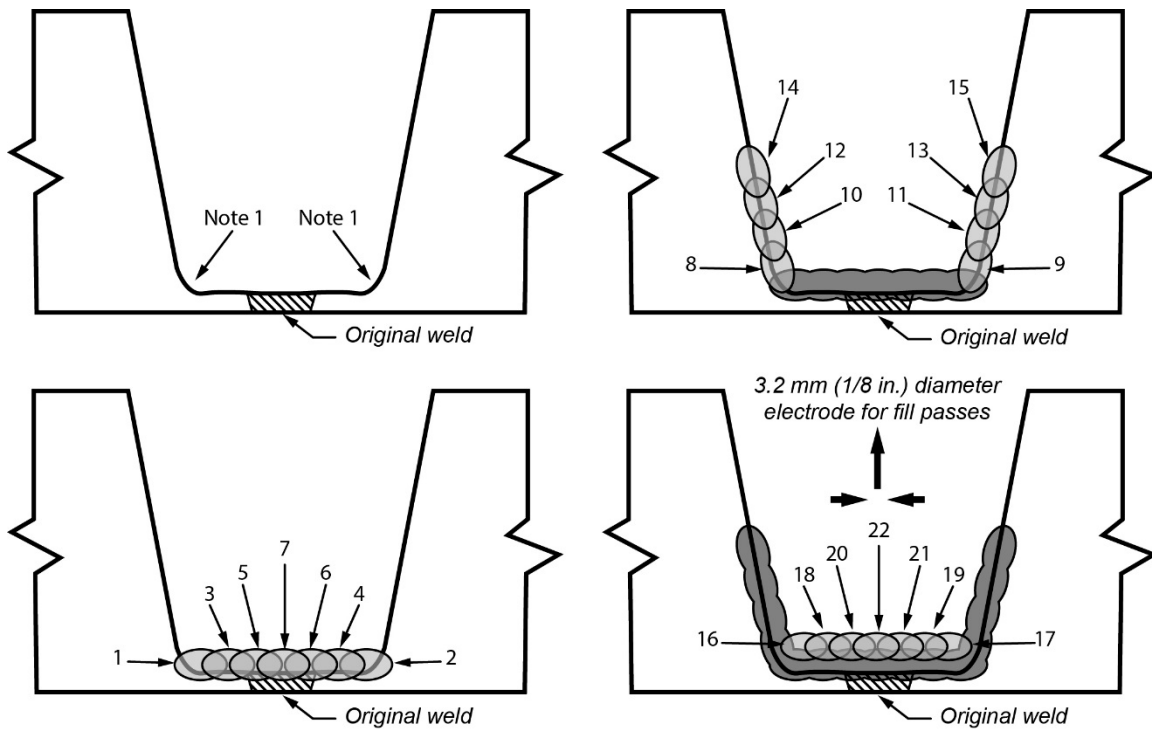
Schematic of the Controlled Fill Welding Procedure for Grade 91 Steel for Full Penetration Weld Repair Using a Land.
